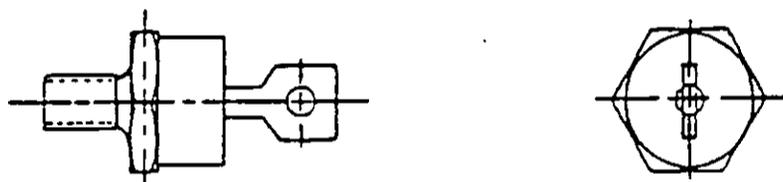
Dimensions of a typical SCR (D0-5 package).
